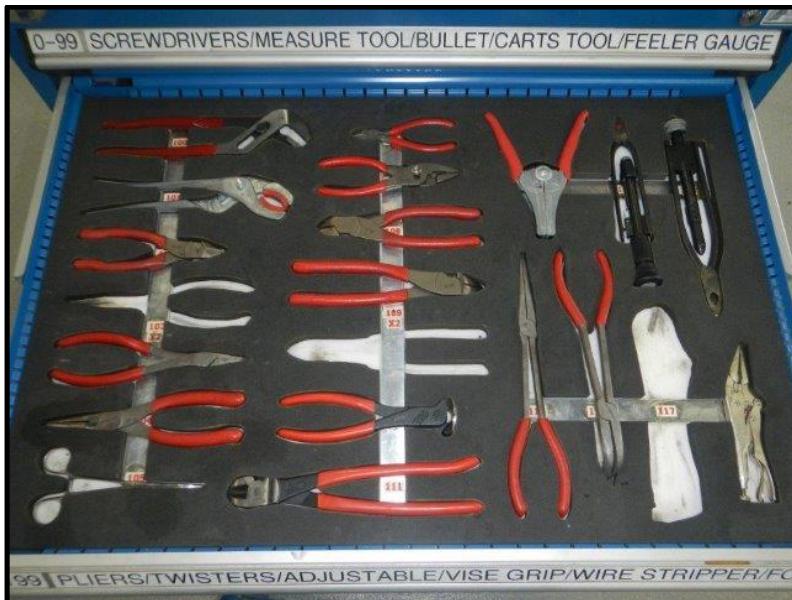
An example of drawer 2 of tool kit in use at 425 SQN
